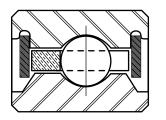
Double Lami-Shield<sup>®</sup> bearing
